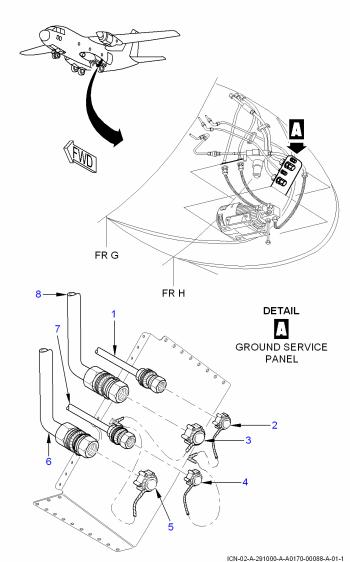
Bleeding Hydraulic System - Bleed (sheet 1/2)
